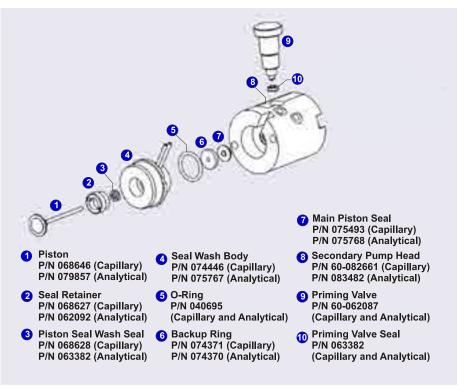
DP/SP: Secondary Pump Head Assembly
